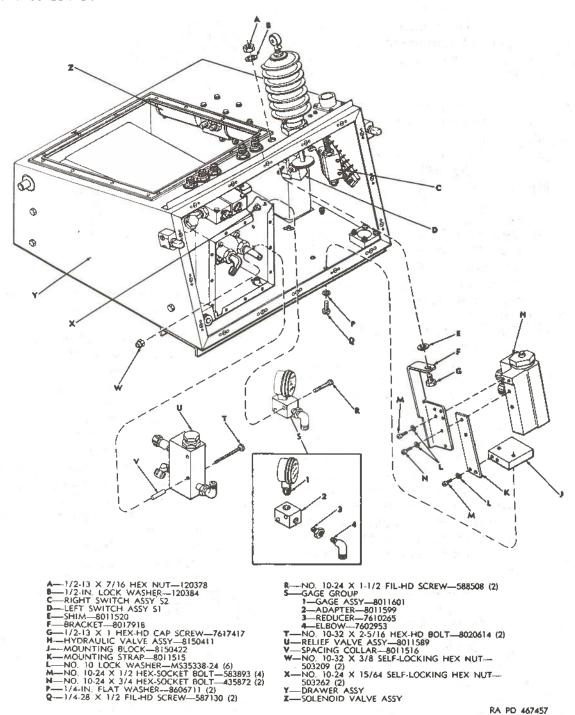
Hydraulic control unit—partially exploded view No. 1.
